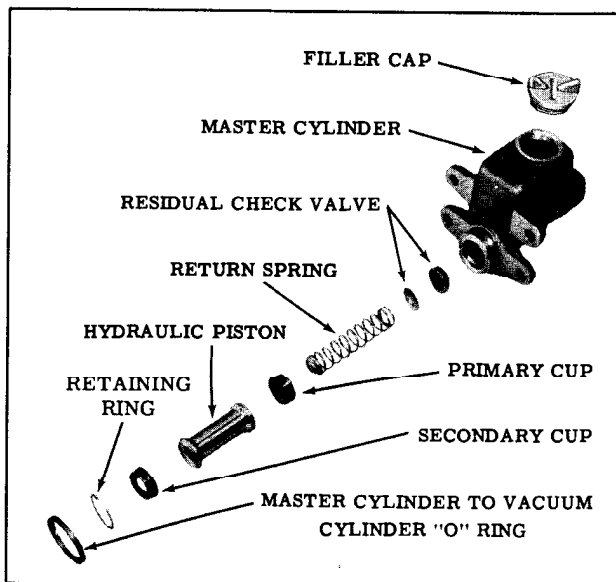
Master Cylinder (Bendix Power Brake)
